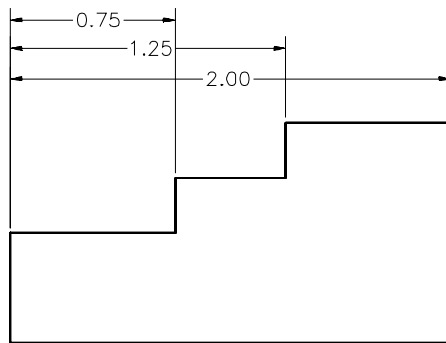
Drawing for Exercise 3, before editing dimensions
